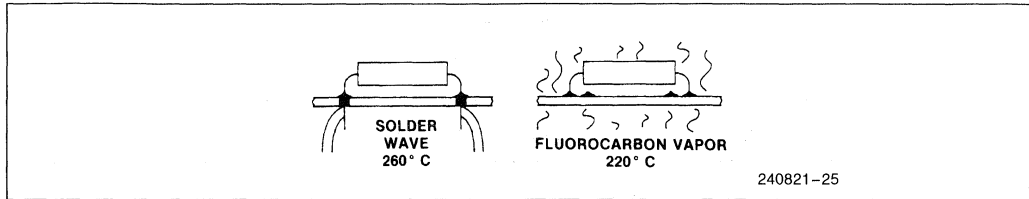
Component Exposure to Wave Solder and Vapor Phase Environments
